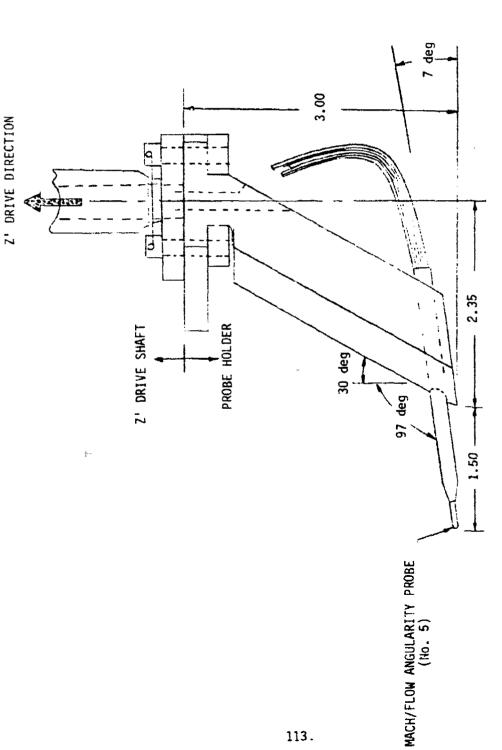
PROBE HOLDER ASSEMBLY-MACH/FLOW-ANGULARITY PROBE
